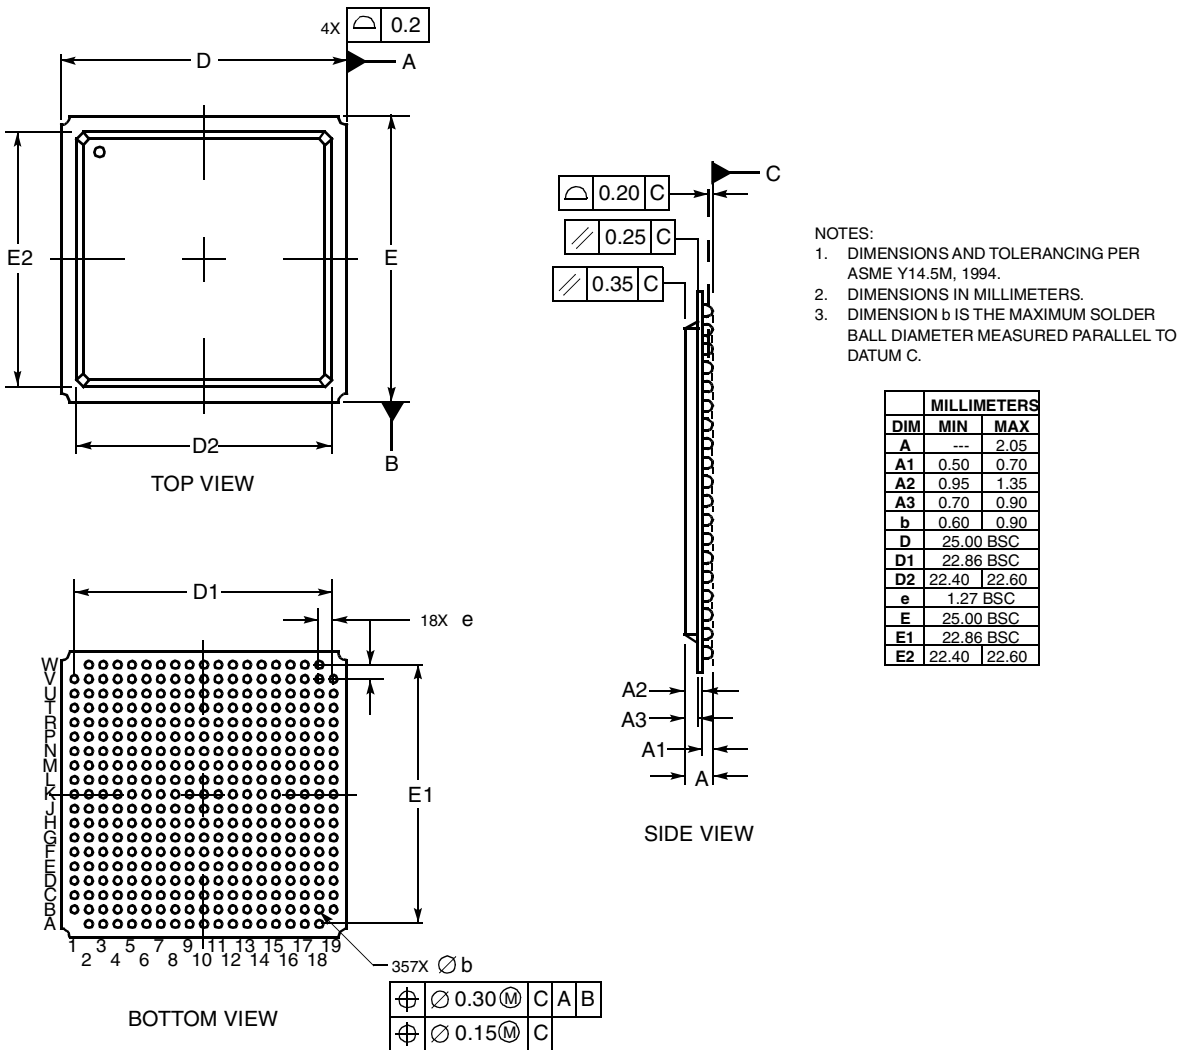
MPC8241 Package Dimensions and Pinout Assignments (ZP Package)
